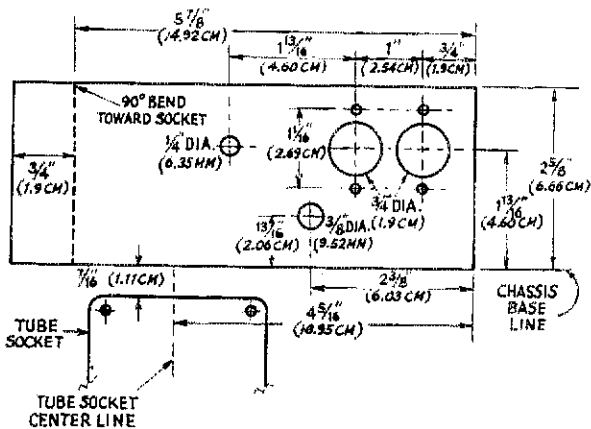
A sheet-aluminum bracket is used to mount components for the input circuit. The position relative to the tube socket is shown. The bracket may be fastened to the chassis by pieces of angle stock, or a lip may be formed along the bottom if the material is cut slightly larger in height.
